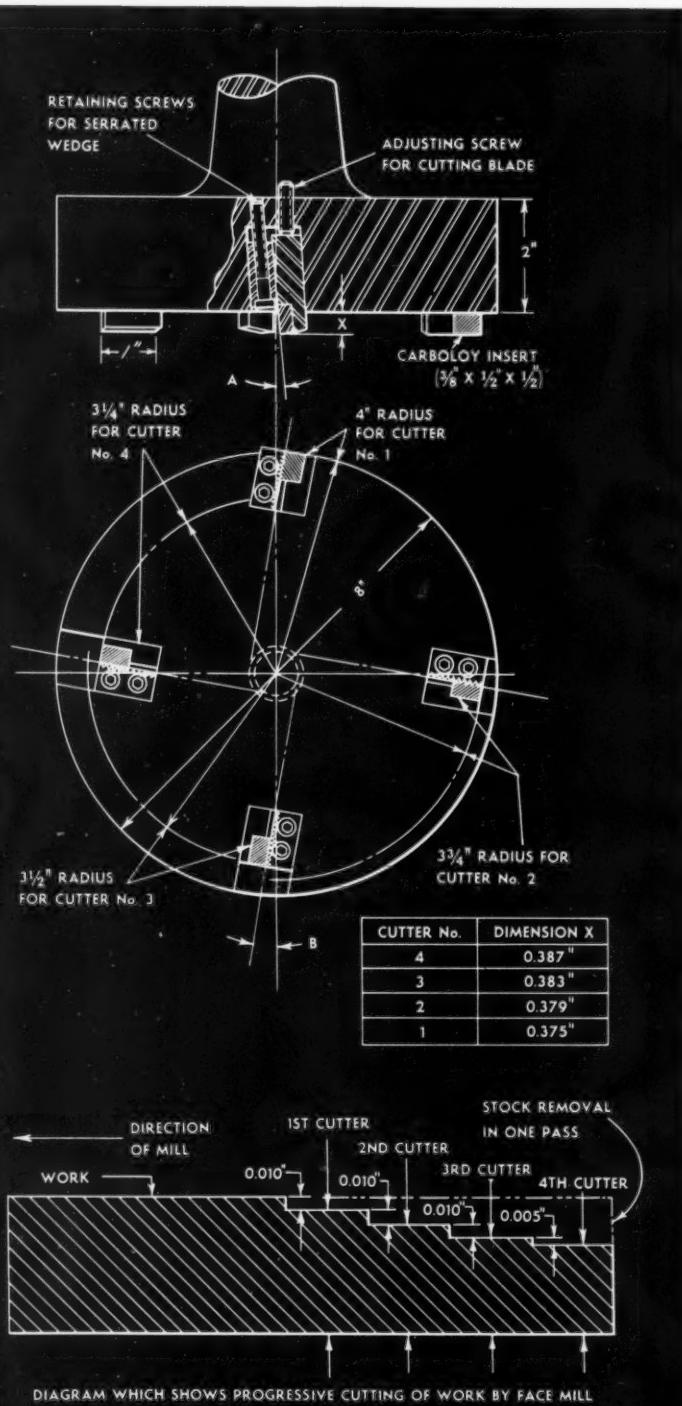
Construction Drawing of a Typical Carbide-tipped Face Mill for Machining Steel, which Shows the Negative Rake Angle A and the Angle B Offset of the Carbide Tips from Radial Lines
